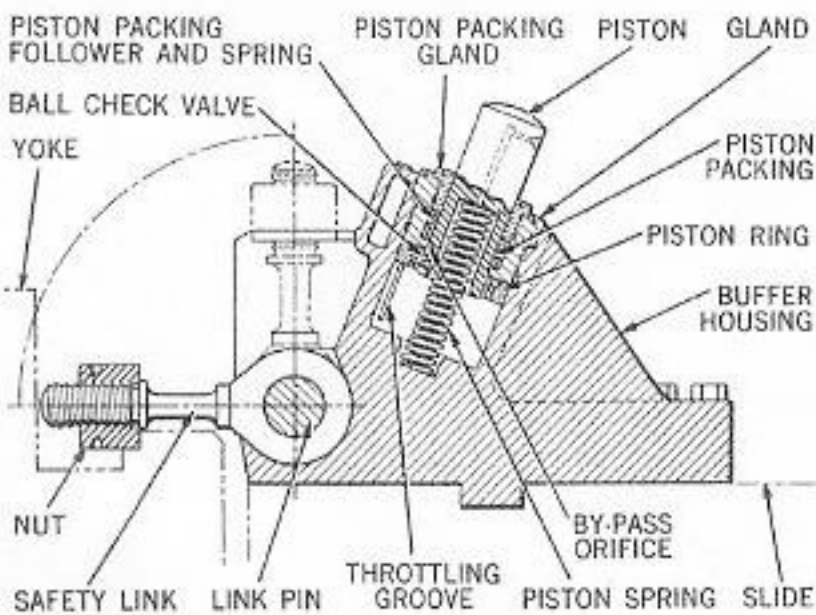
Depression Buffer and Yoke-Locking Device, Sectional View
